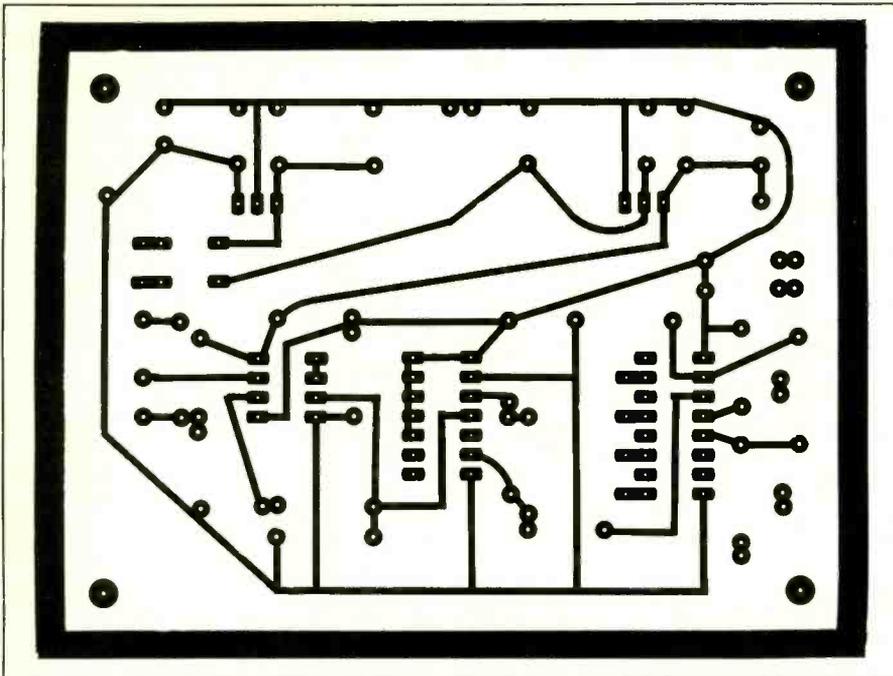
Actual-size etching-and-drilling guide to use for fabricating printed-circuit board.
